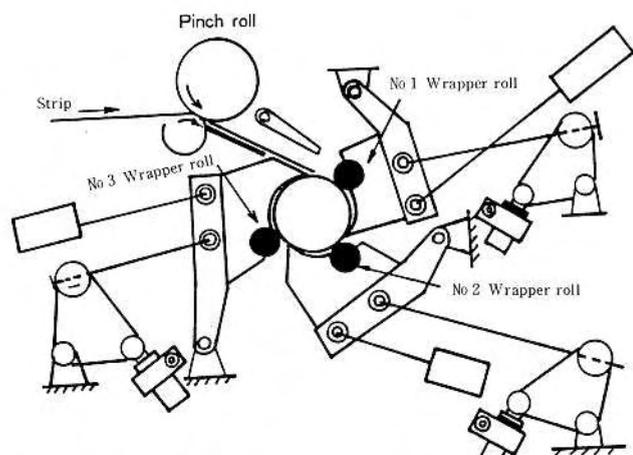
Schematic Diagram of Wrapper Roll in Hot Strip Mill Coiler
